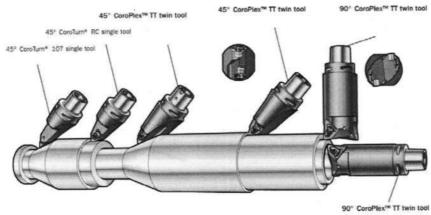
Tools for multi-task machine tools offered by Sandvik [2]
